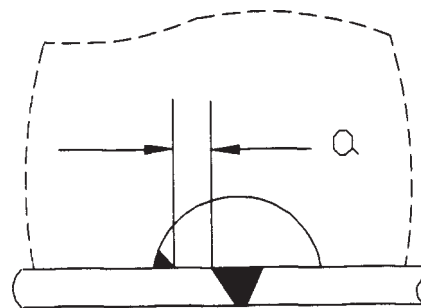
Improper Distance Between Butt Weld and Scallop
